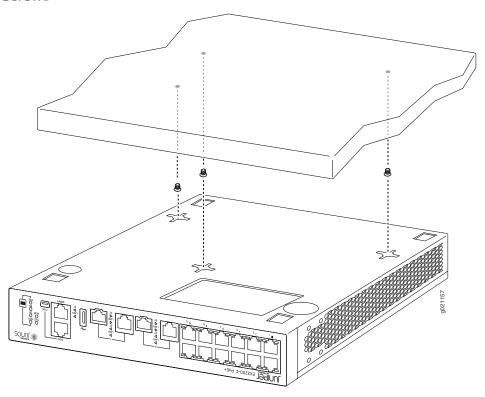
Mounting the EX2200-C Switch On or Under a Desk Using Screws
